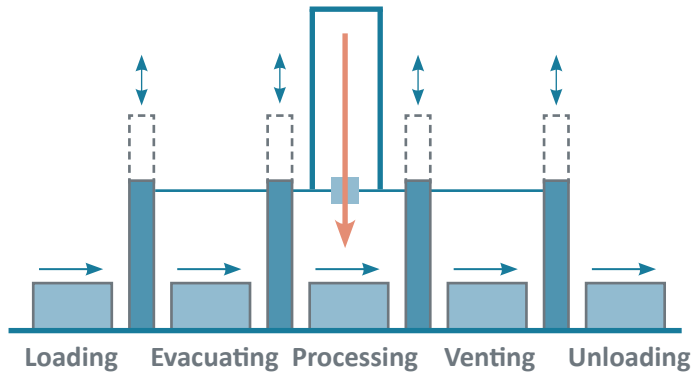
EB welding system with loading and unloading chambers linked to the vacuum chamber for welding (Reproduced courtesy: B. Pekkari)
